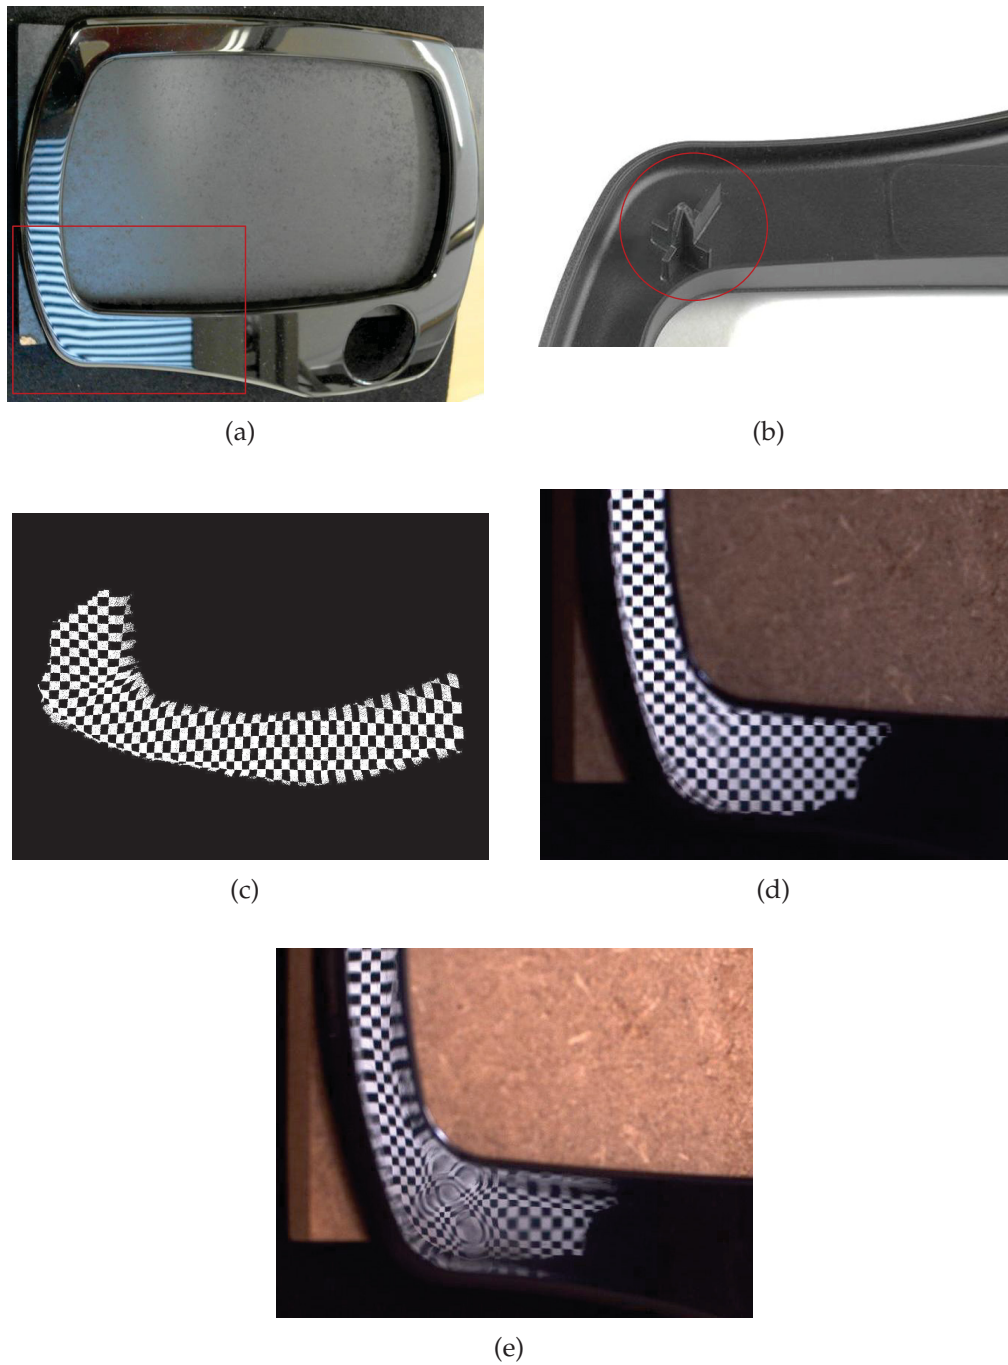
Surface inspection with inverse patterns. a) Front side of the whole injection molded part where the inspected area is marked, b) Back side of the inspected area where the positioning pin which causes the inspected sink mark is marked, c) Inverse pattern displayed by the screen, d) good part, e) bad part
